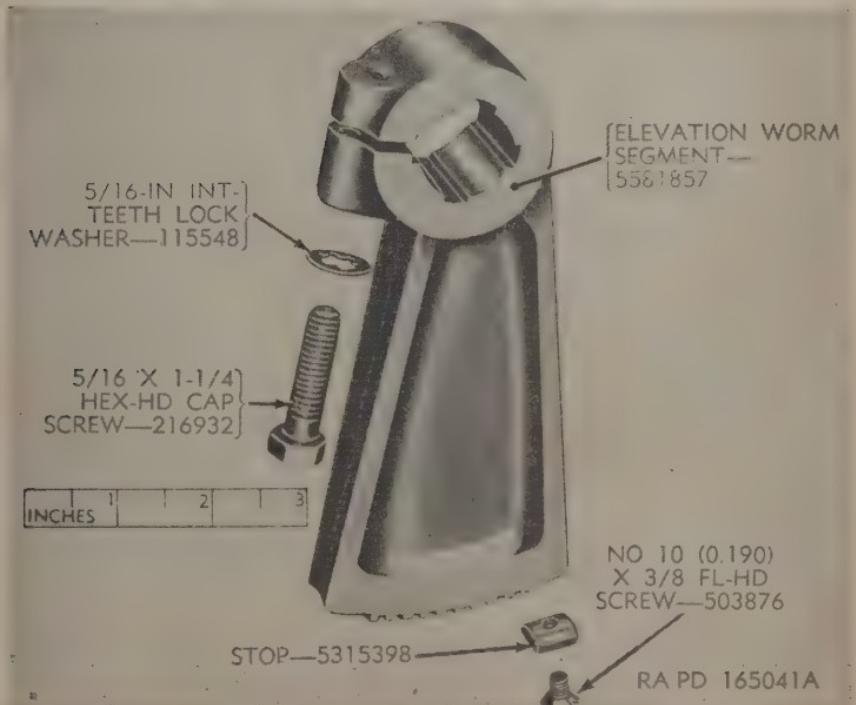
Telescope mounts M52C and M52D—elevation worm segment assembly—exploded view.
